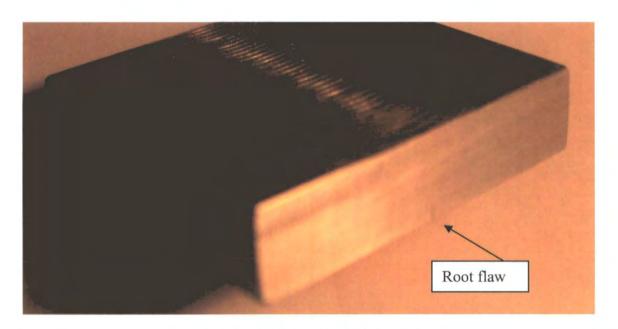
Flawed Section of C2 Weld from TRIAL 5
